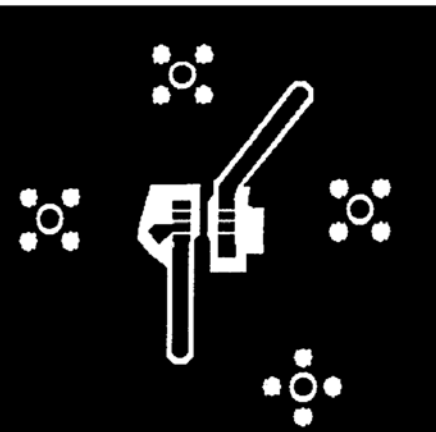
Inverter SOIC Board Layout (Solder Side) (Looking Through the Board)
